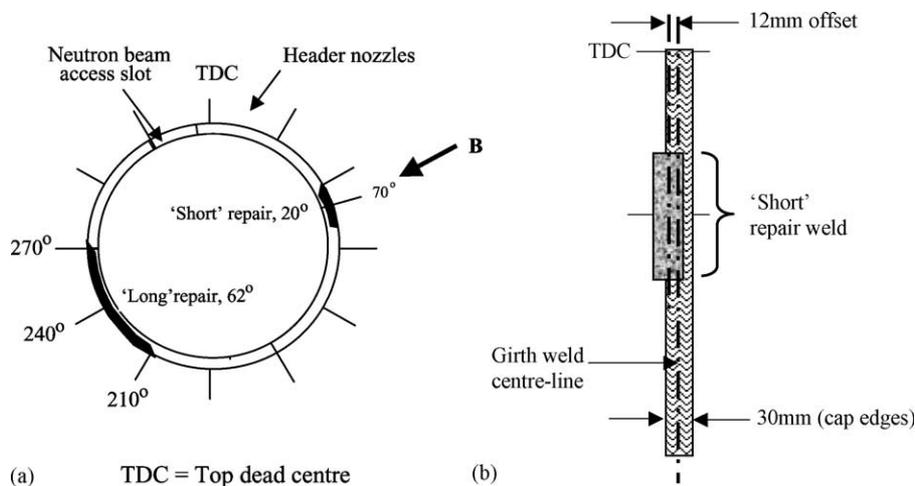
(a) Section A/A (see Fig. 1) showing circumferential positions of short and long weld repairs, (b) view on B of short repair showing offset.
